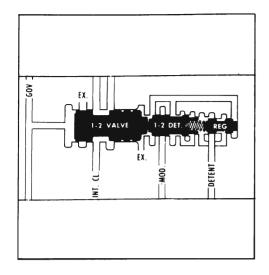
1-2 Shift Valve and 1-2 Modulator Valve
